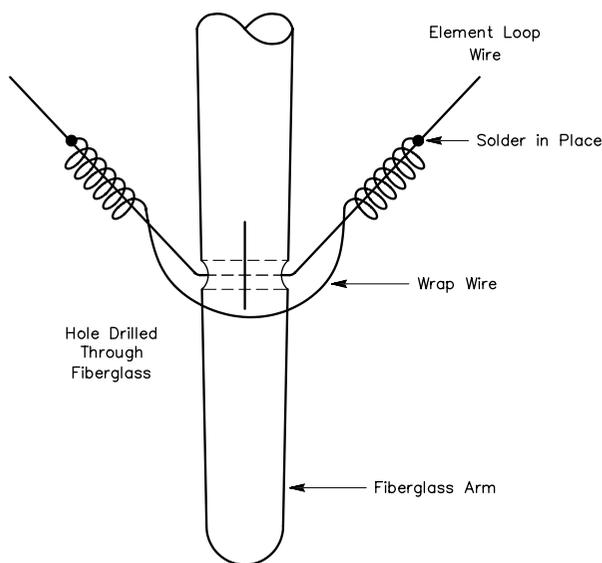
A method of assembling a corner of the wire loop of a quad element to the spreader arm.
